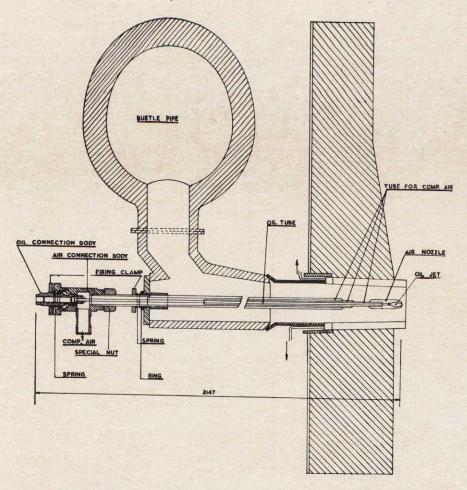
INJECTOR LANCE ASSEMBLY THROUGH THE TUYERES
